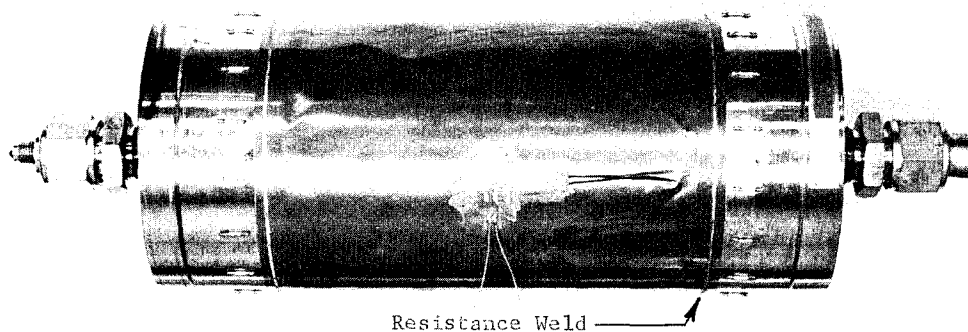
Fitting Resistance Welded to Liner,
